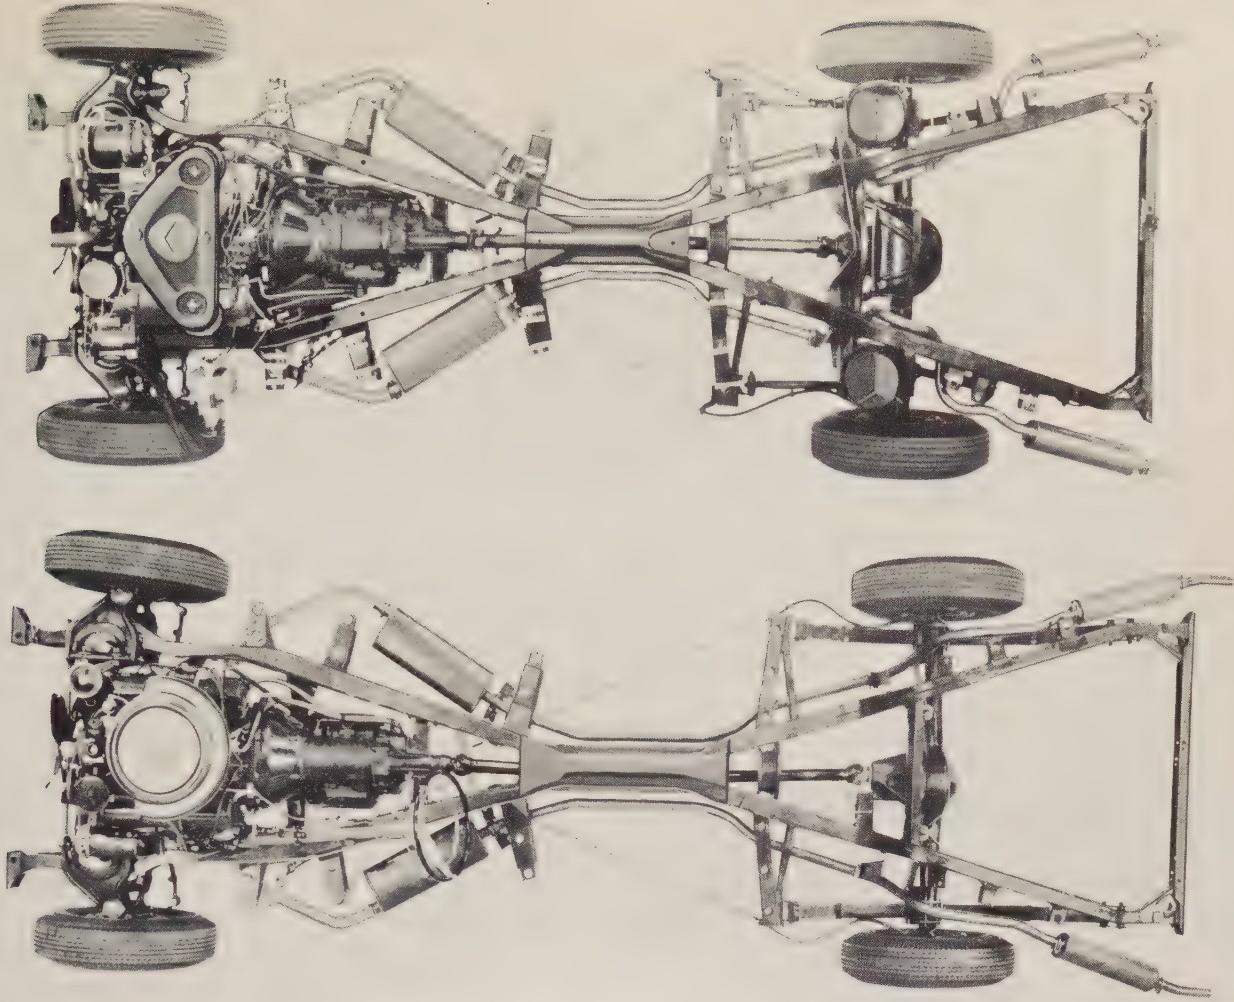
The tubular center X-frame is easily adapted to use in the design of the completely different Eldorado Brougham (top), as shown in this comparison with a 1957 Series 62 Cadillac chassis (bottom). The Eldorado Brougham
